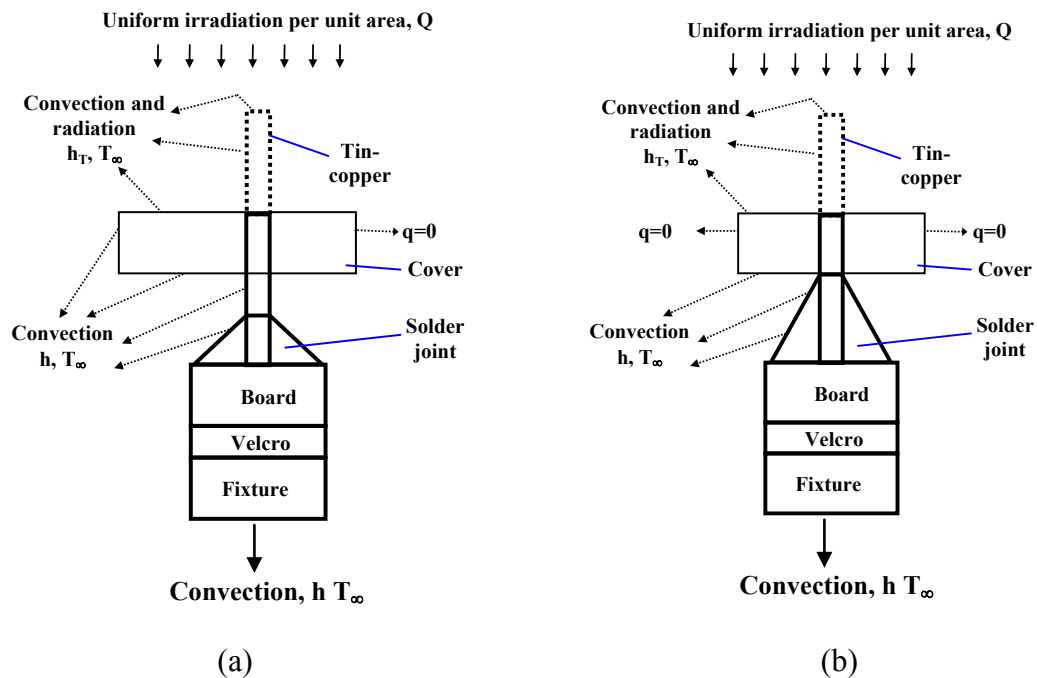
Schematic of one cover PCB assembly for: (a) 90° and 120° solder joints, and (b) 60° solder joint.
